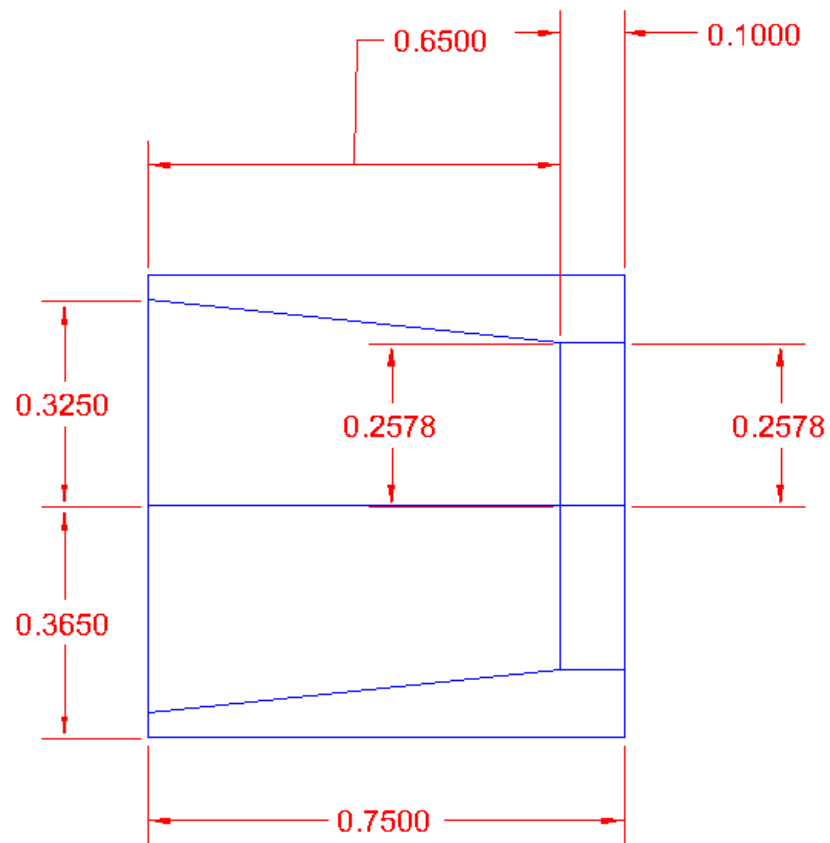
Aluminum Sleeve Side View, Dimensions in inches (Misilo III, 2018)
